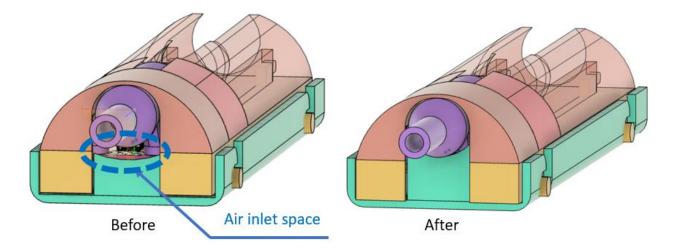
The inside parts and the electronics were protected by adjusting the dimensions of the u shape mouthpiece holder.
